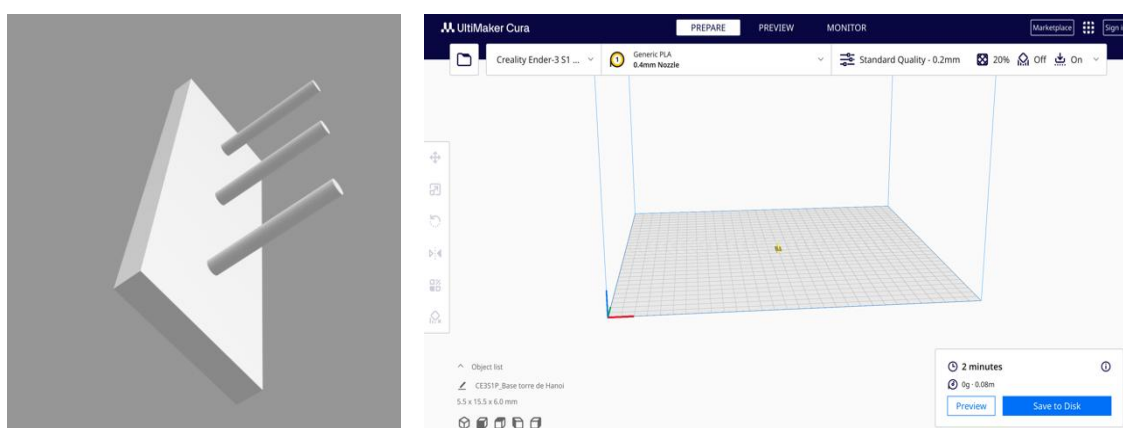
Evaluating and Redesigning after printing parts of the manipulatives (group 2).
